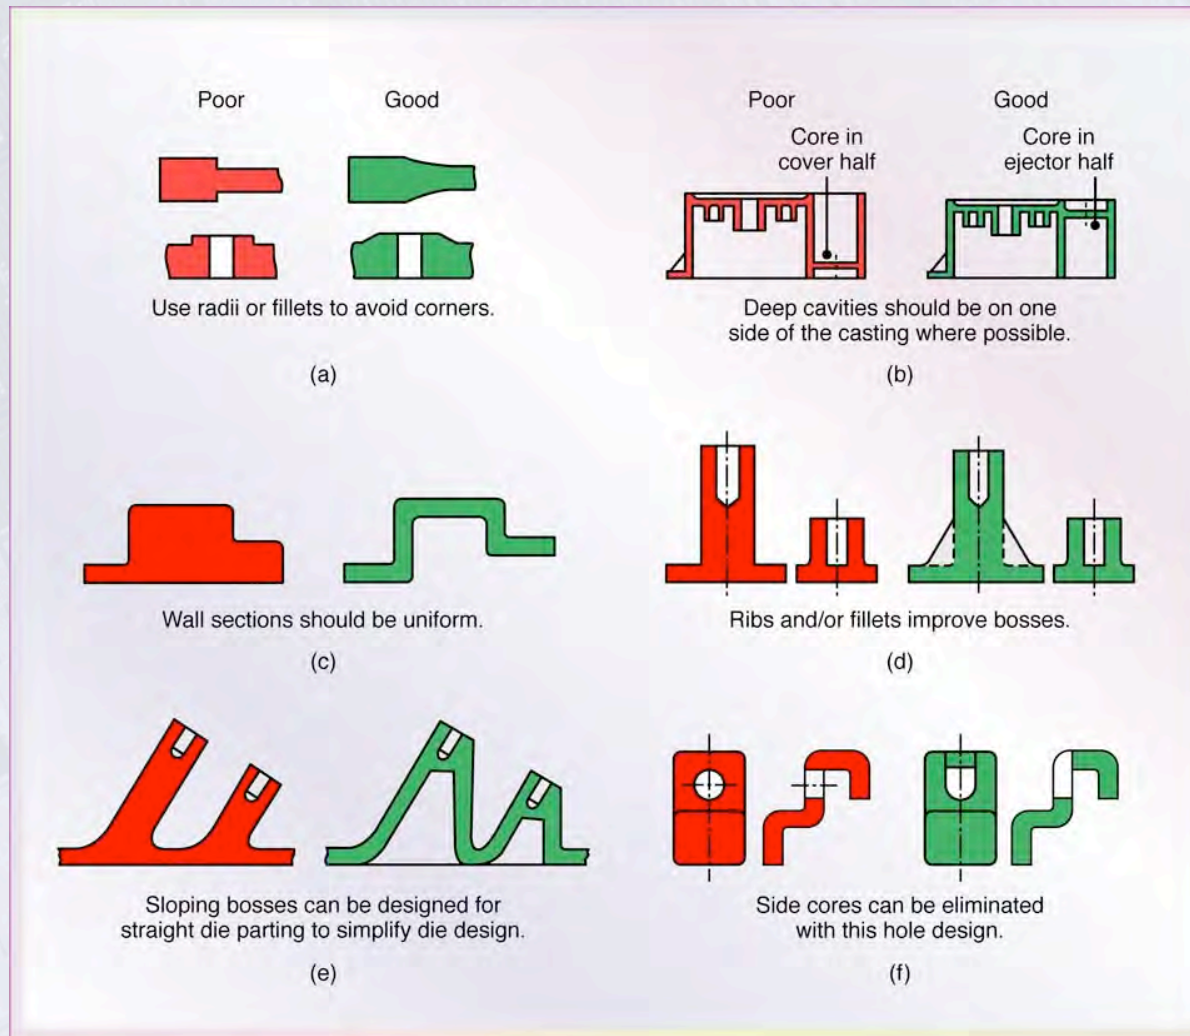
Suggested design modifications to avoid defects in castings
